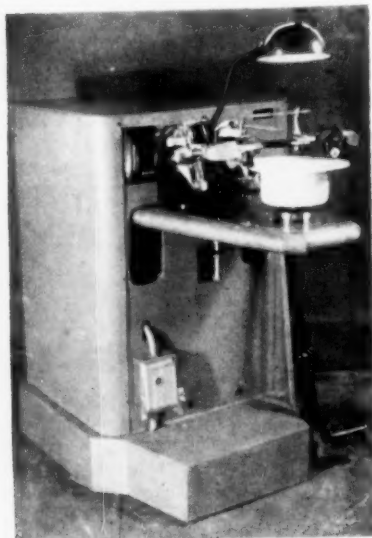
"Ryckman" edge-lining machine with plate positioned on plaster chuck
